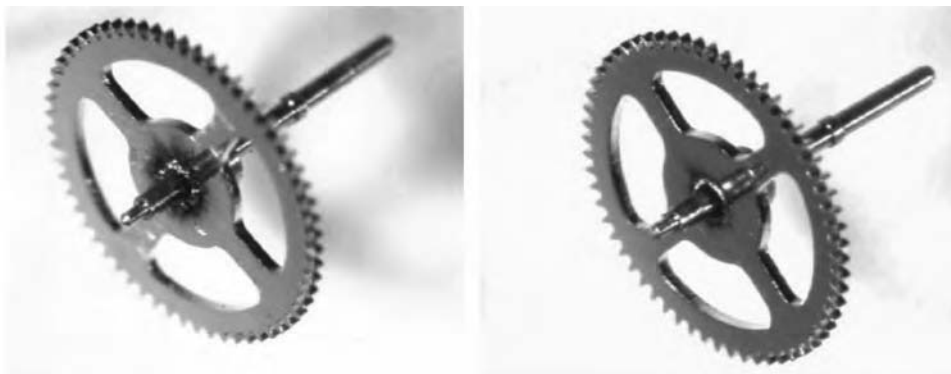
Conventional overlapping spot-pulsed seam weld (left) compared to SHADOW weld (right) in a brass gear-to-steel shaft weld. 0.3 mm (0.01 in.) shaft diameter. Source: Ref 48
